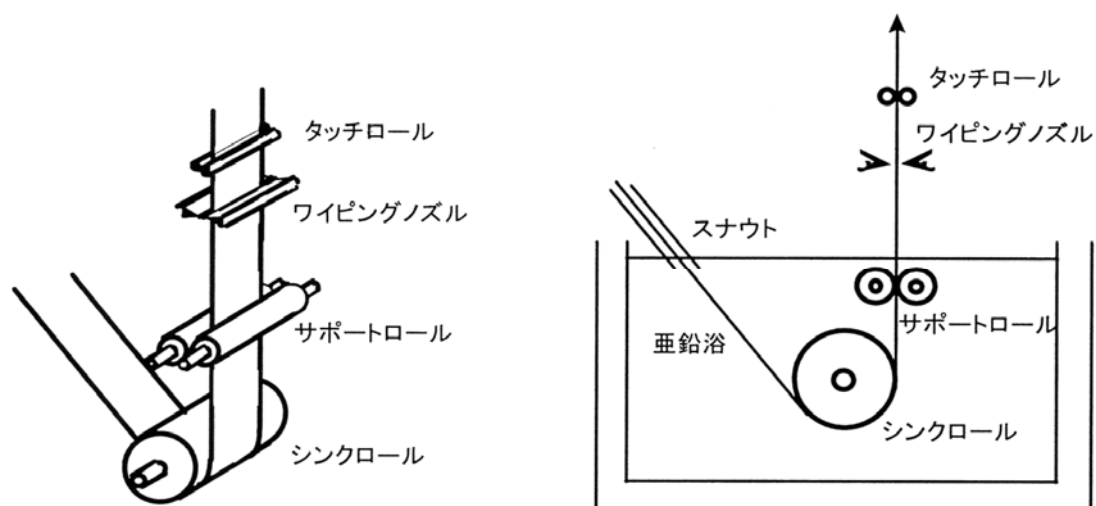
View Showing a Frame Format of Galvanizing machine
